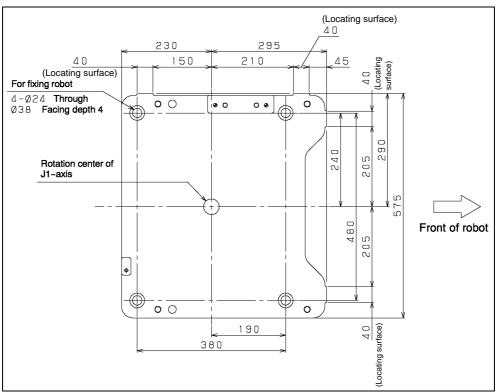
(b) Dimensions of the robot base (M-421iA)
